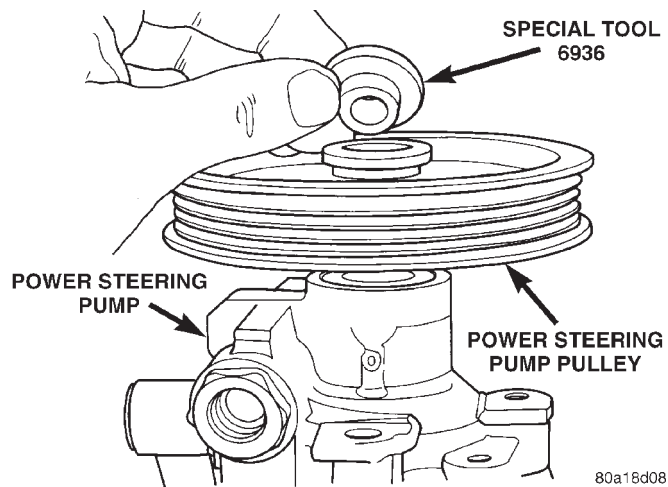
Special Tool 6936 Correctly Installed On Power Steering Pump Pulley
